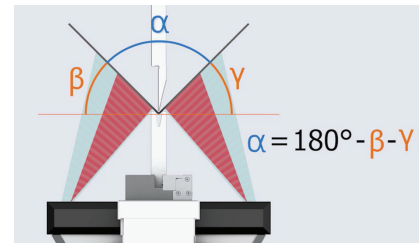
B.8 : exact bending angle achieved due to measuring units
